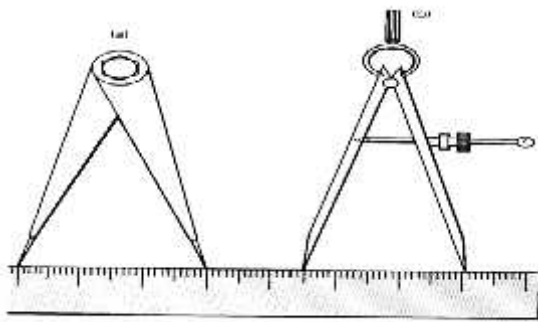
Setting dividers: (a) firm-jointed type; (b) spring-controlled type.
